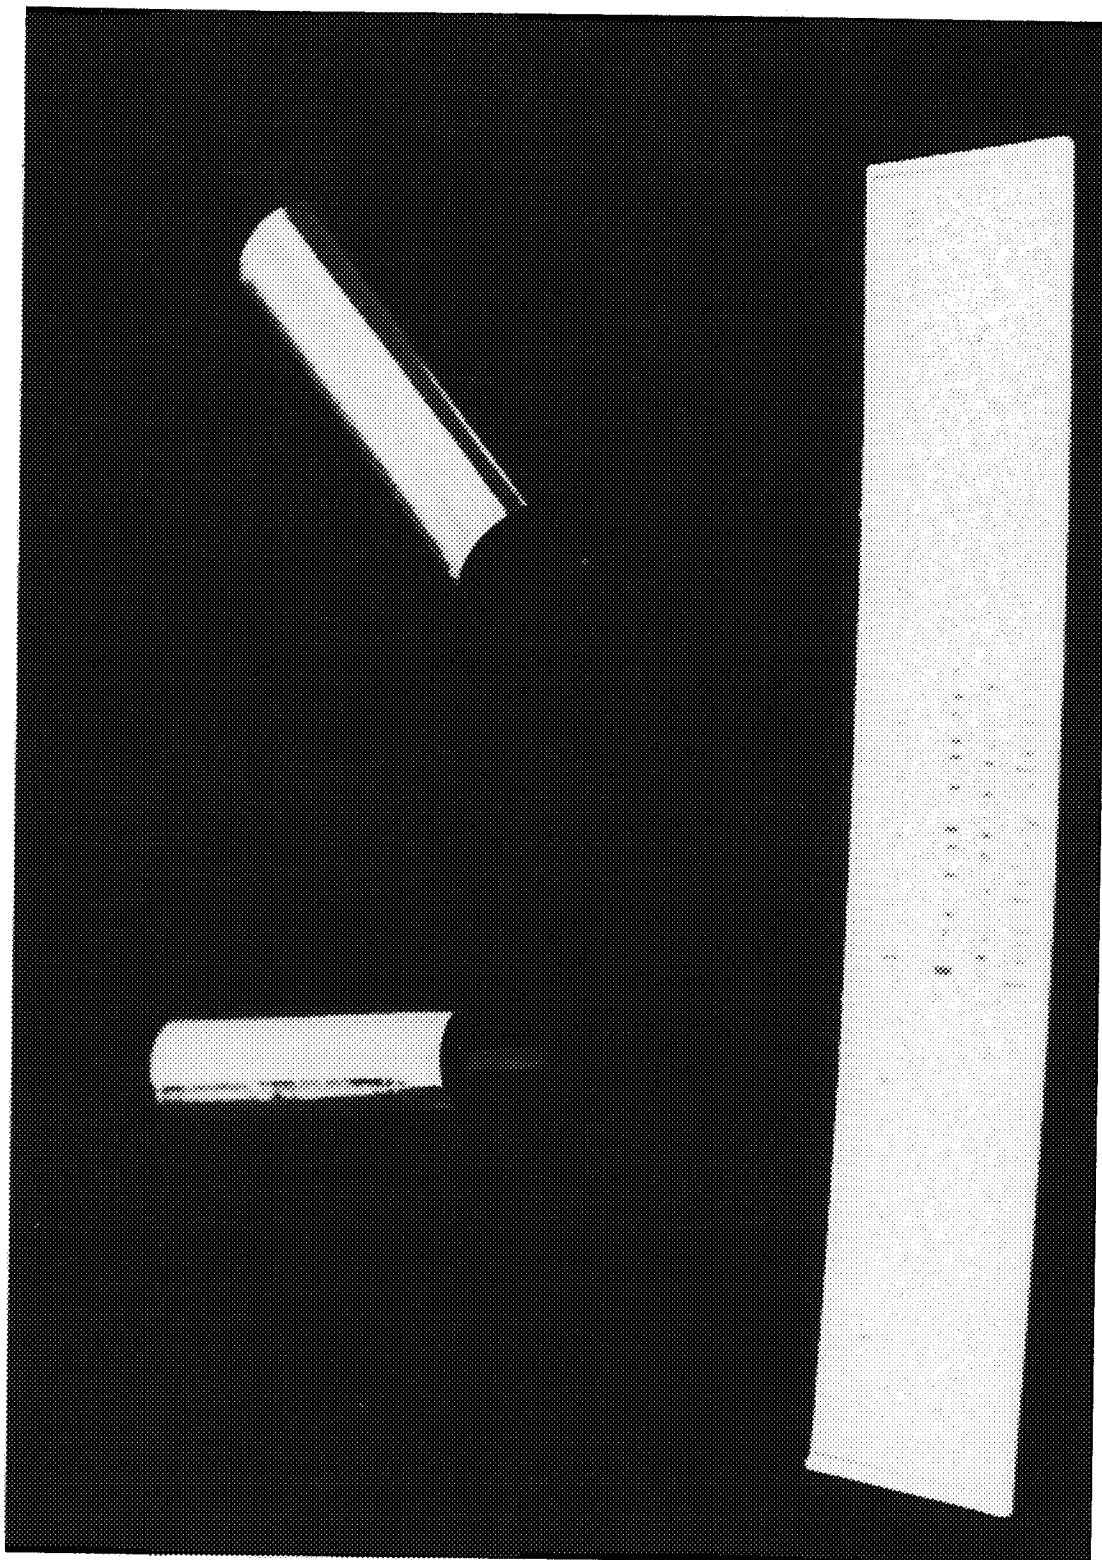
Welded Foil DTC Specimens
